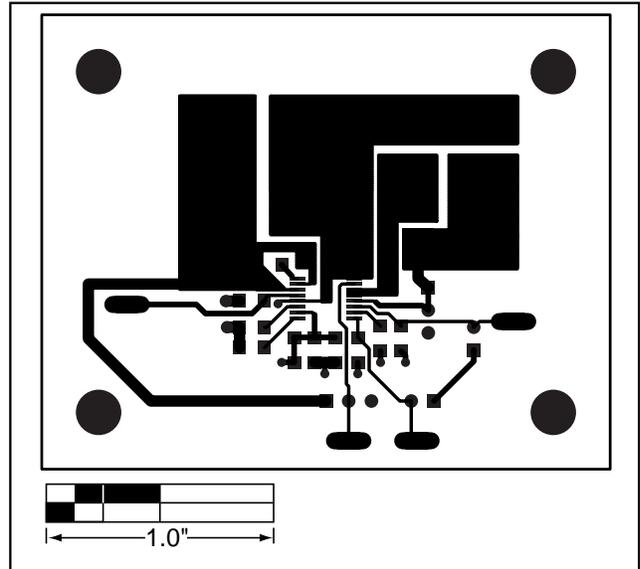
MAX1685 EV Kit PC Board Layout—Component Side
